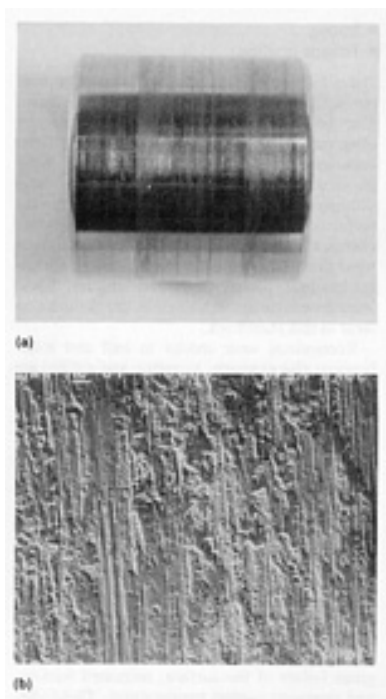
Smearing (severe mechanical wear) on the surface of a cylindrical roller shown at two magnifications. (a) 4 \times . (b) 410 \times
